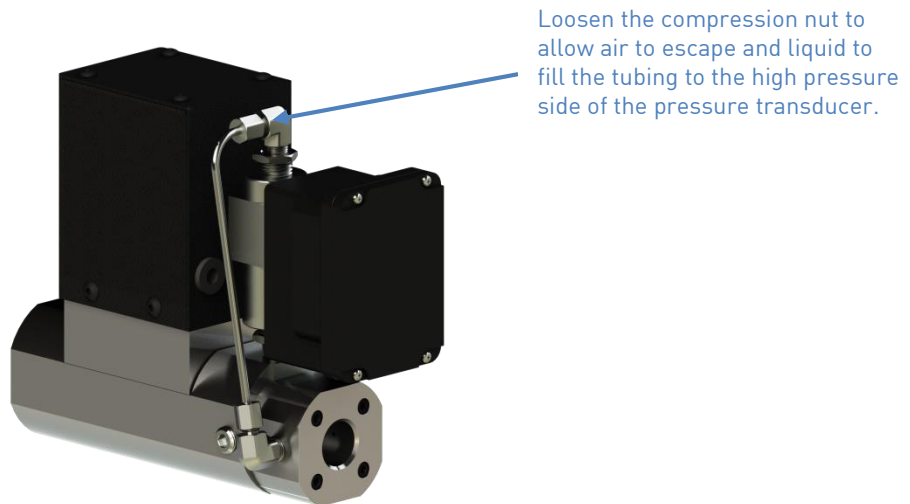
eFlo-L unit – showing compression tube fittings for liquid purging
